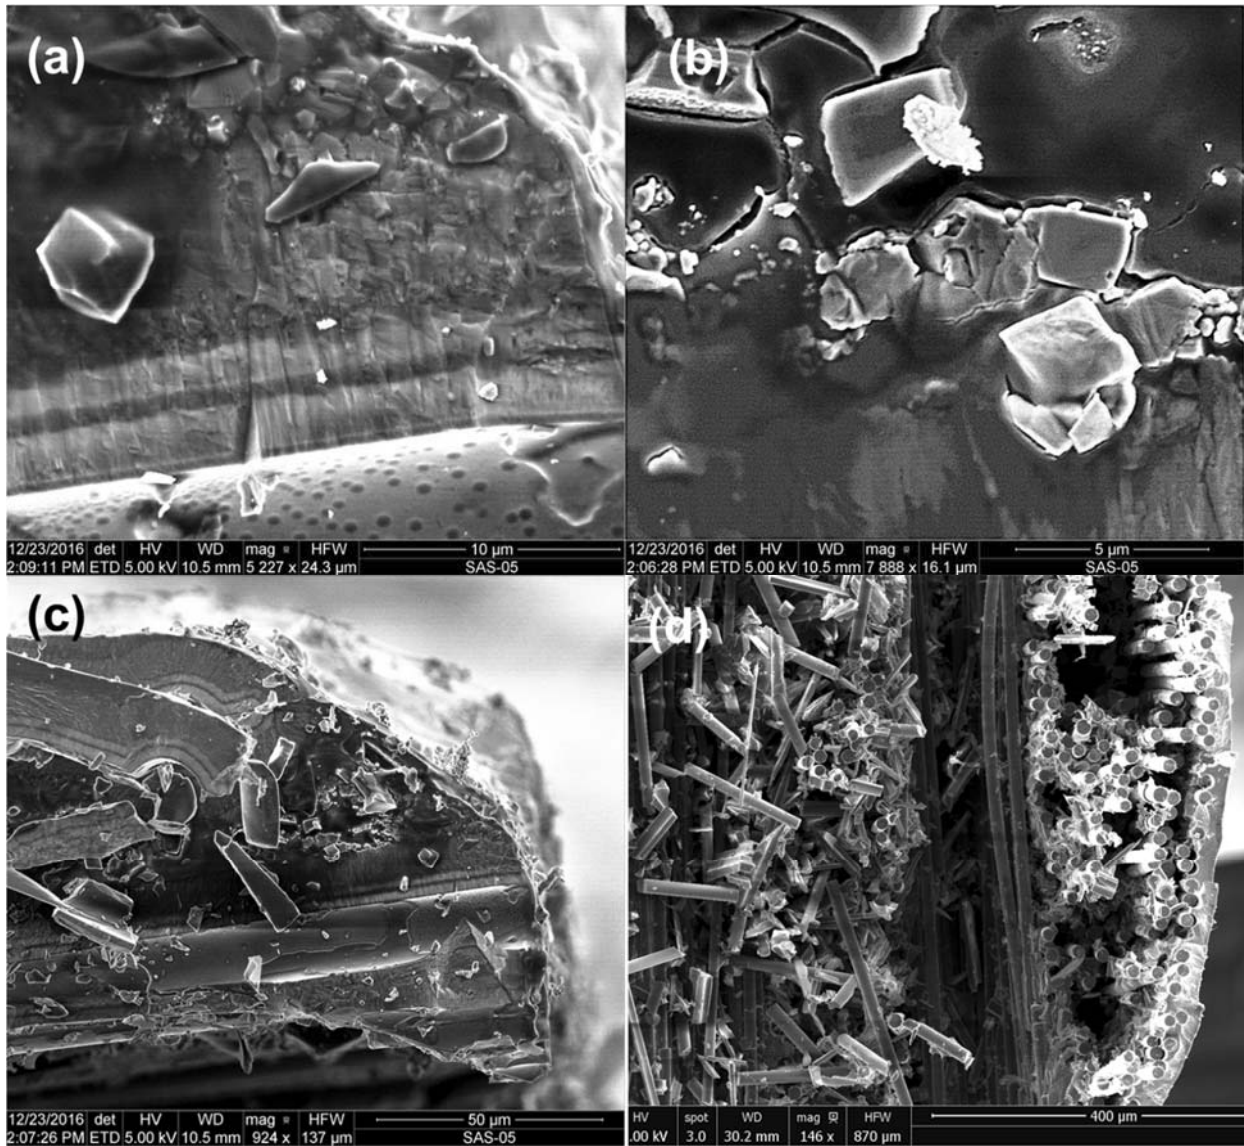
Higher-magnification images of the fracture surface of specimen 16-031 tested in fatigue at 1200°C in air showing (a) fractograph of CVI-SiC layer surrounding fiber; (b) fractograph of matrix in region between fiber tows; (c) failure of tow at edge of specimen; (d) transverse fibers adjacent to pull-out in exterior fiber tow
